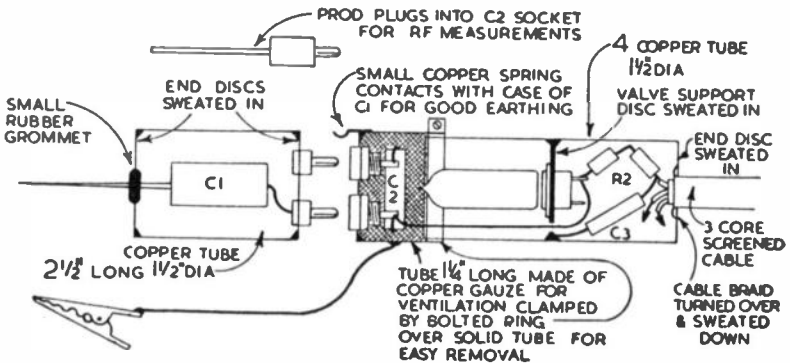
THE VALVE VOLTMETER A.C. PROBE
